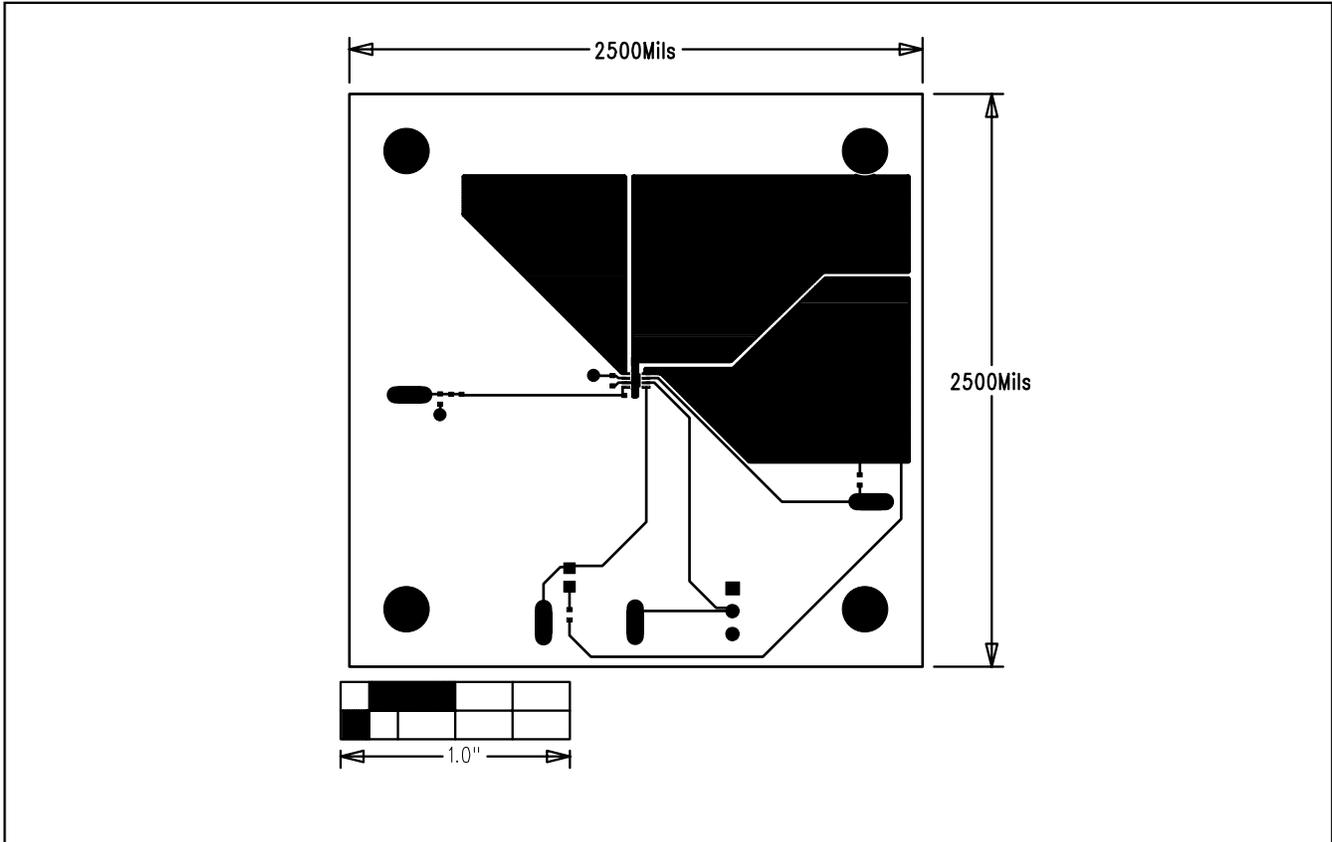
MAX8808 EV Kit PC Board Layout—Component Side
